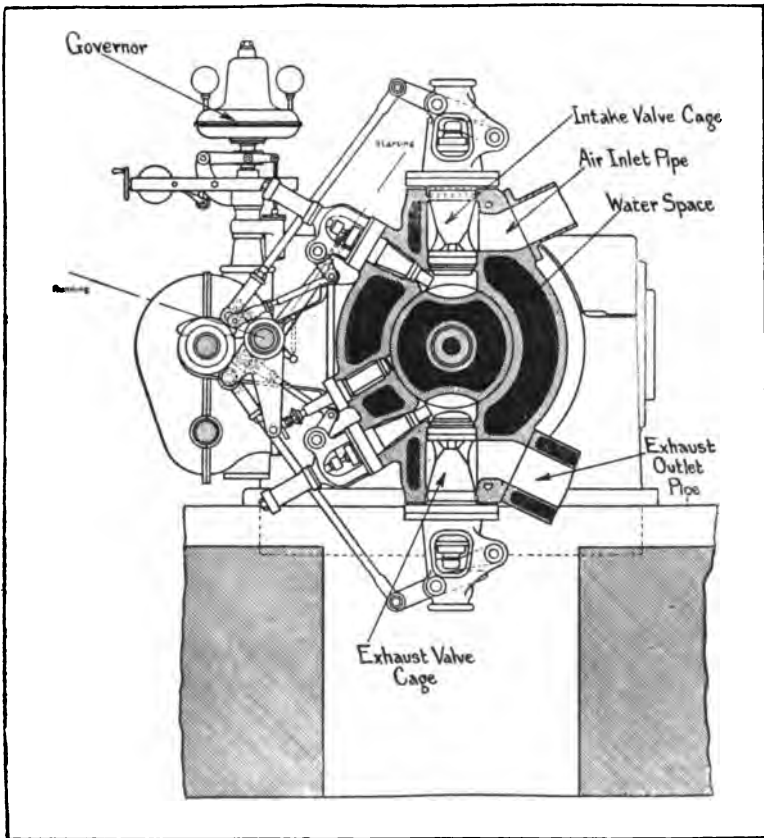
Sectional view through valve chamber of Augsburg-Diesel engine.
